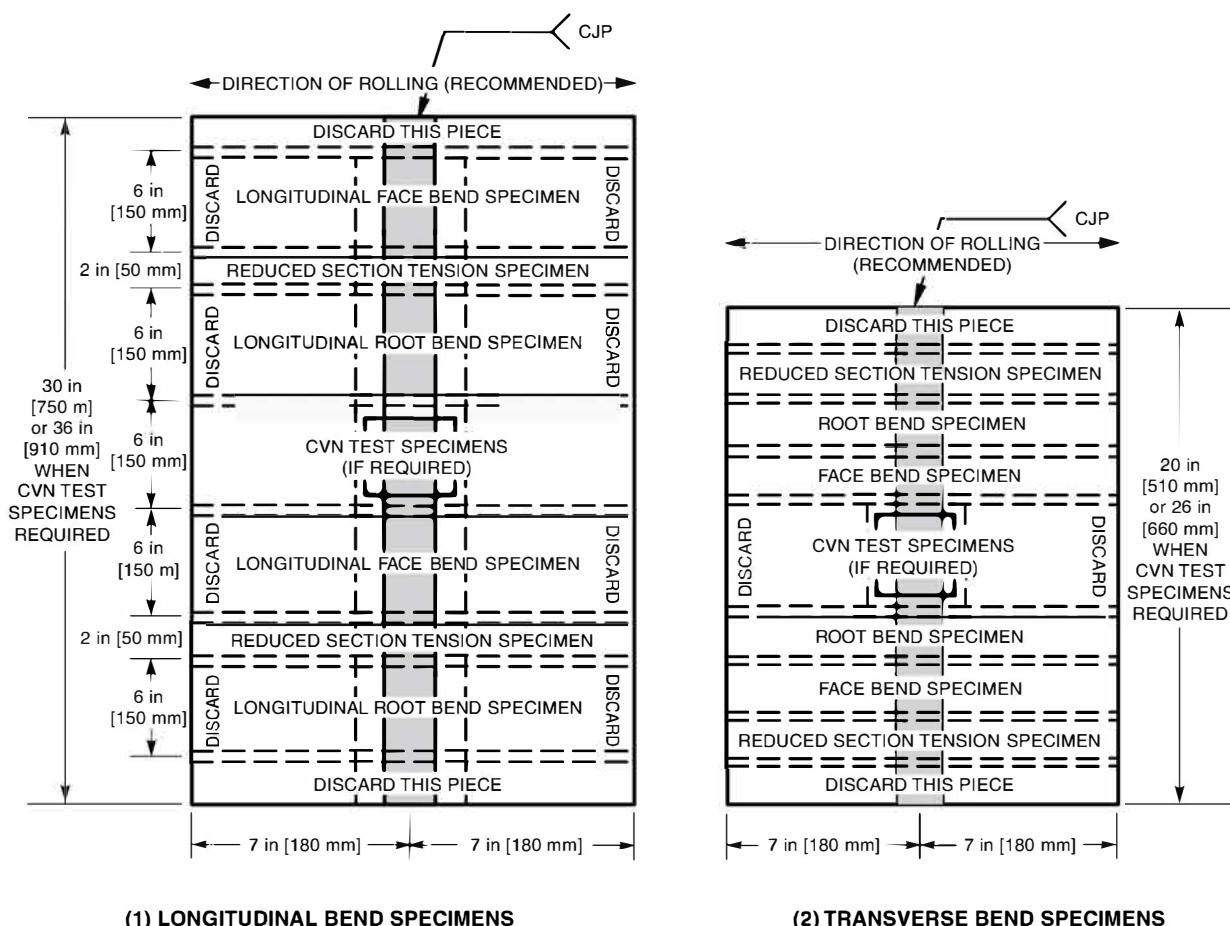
Location of Test Specimens on Welded Test Plates—ESW and EGW—WPS Qualification (see 6.10)
